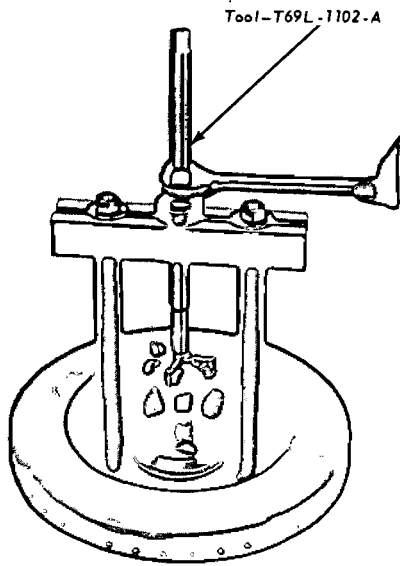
Removing Front Wheel Bearing Cups—Disc (Drum-Type Similar)
